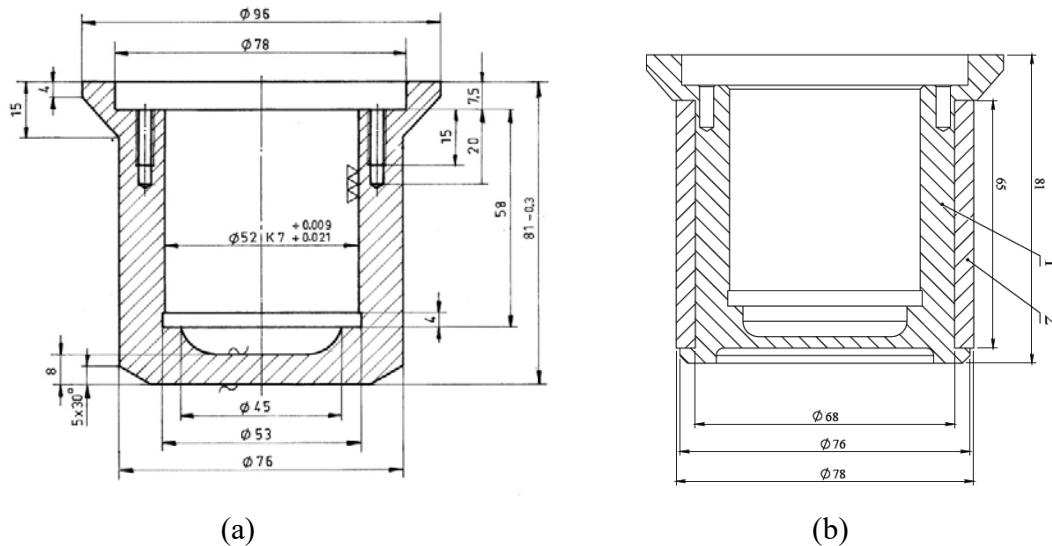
Technical detail of support roller socket. (a. Gray cast iron GG 20 support roller, b. Support roller with polyurethane sheath)
